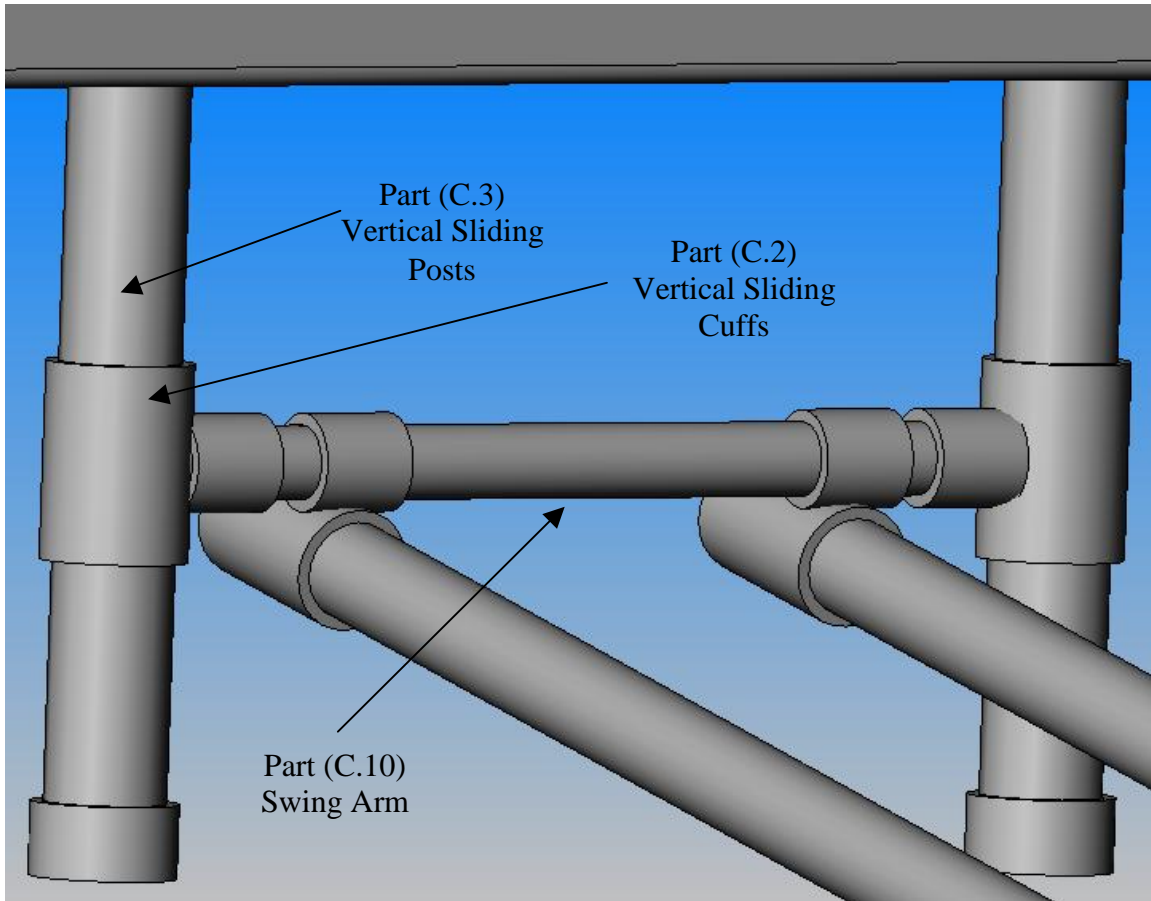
Part(C) Swing arm and slider cuff assembly
